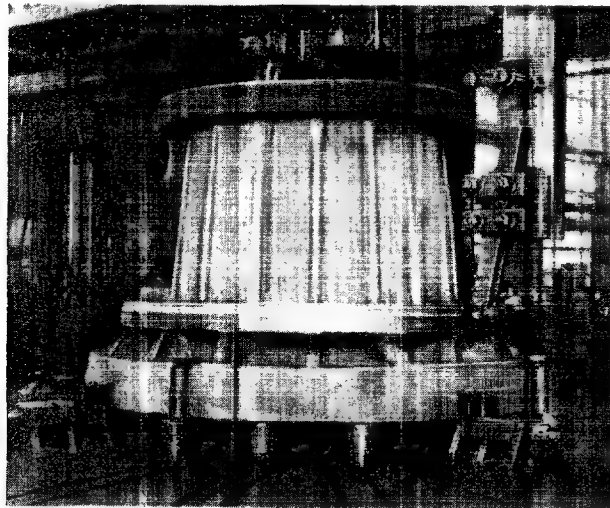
A hub of a spider type rotor of a large hydroelectric generator.
